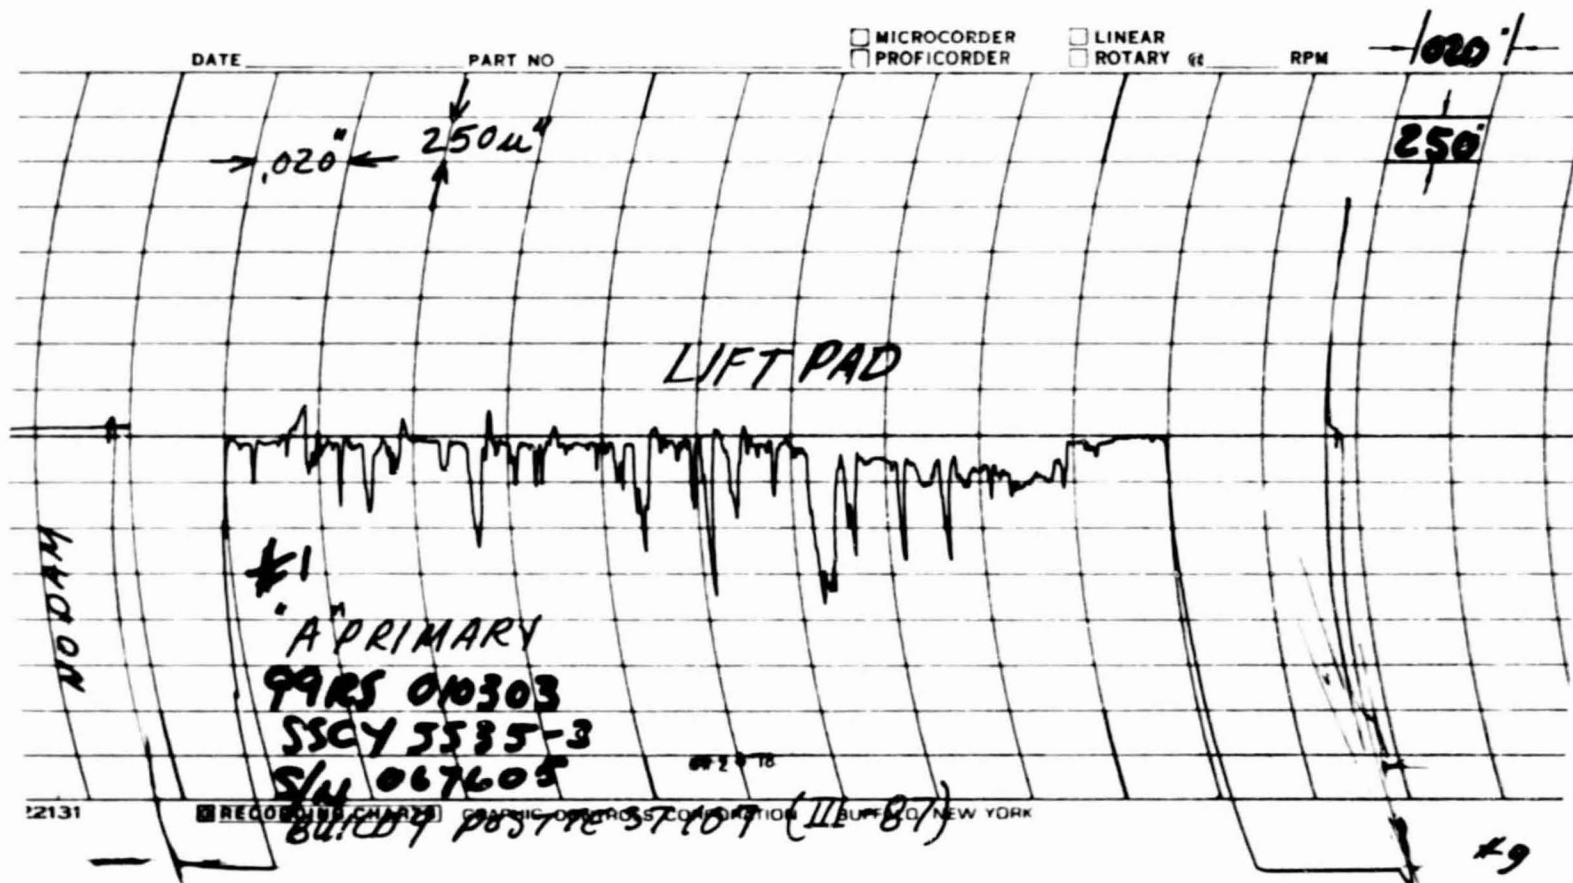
Surface Profile Trace Turbine End Primary Seal Lift Pad 1,
